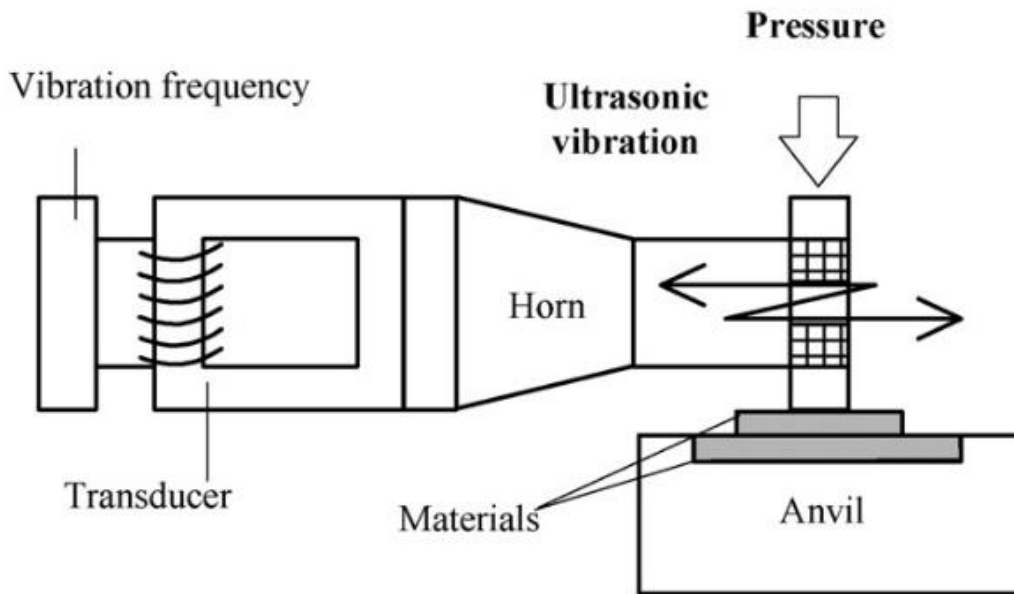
Basic principle of ultrasonic welding [10, p. 955]
